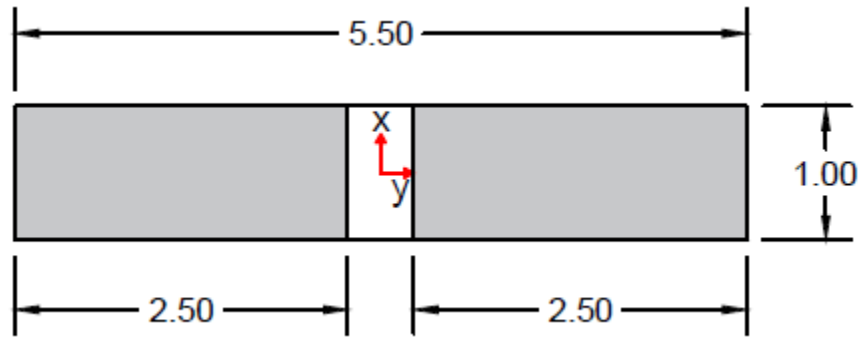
Typical specimen geometry and layout (all dimensions in inches)
